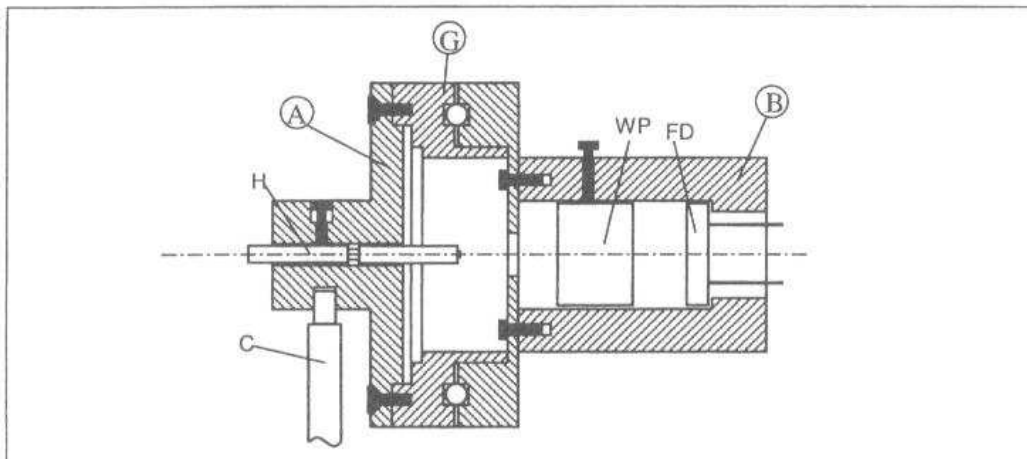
Detection chamber. A - immobil part, B - mobil part, G - goniometer,
